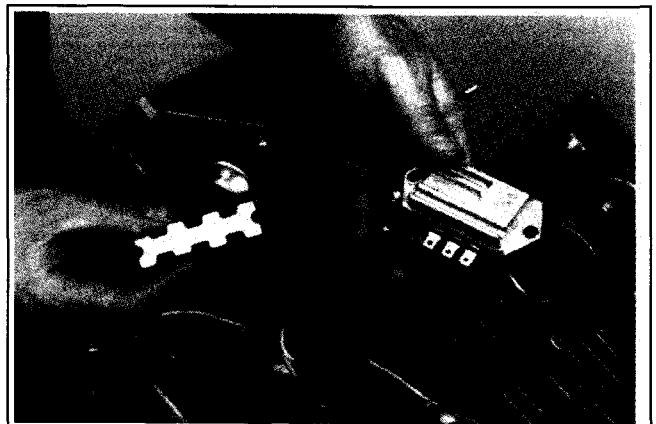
Removing Rectifier-Regulator and Spacer.
